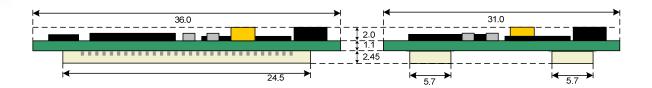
Side View with Connector mounted, 0.5mm tolerances
